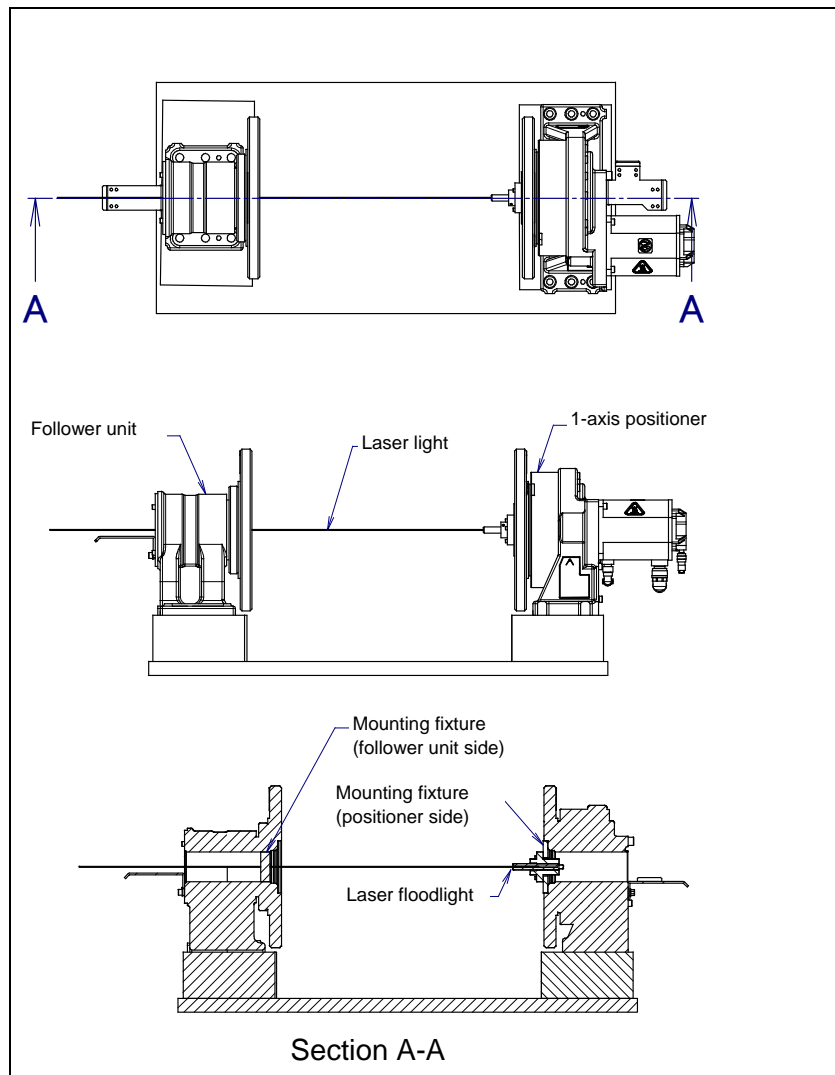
(k) Example of matching the center of 1-axis positioner and follower unit
